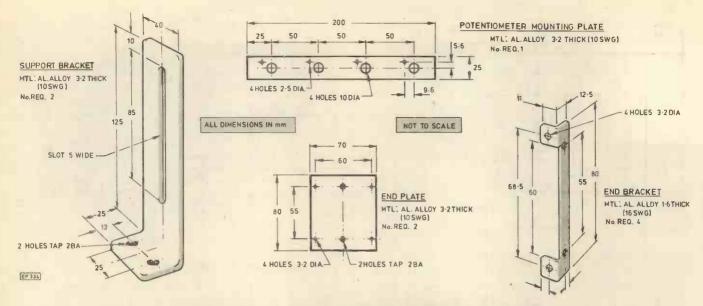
Bending, cutting and drilling details for brackets and plates.
